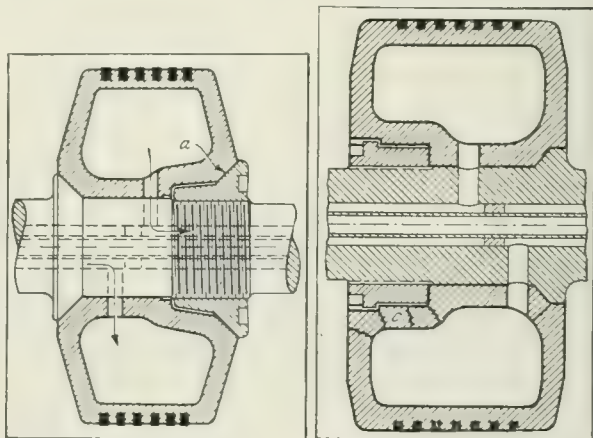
The Latest Form of Piston. Fig. 4.—An Older Form and One of Its Defects.
